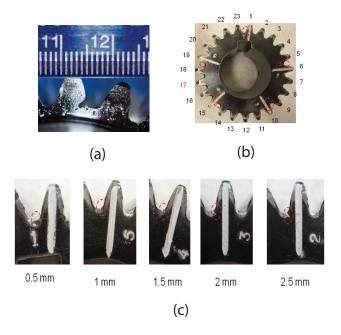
Gear defects: a) crack on one tooth b) crack on 5 teeth c) crack sizes on 5 teeth [14], [15]
